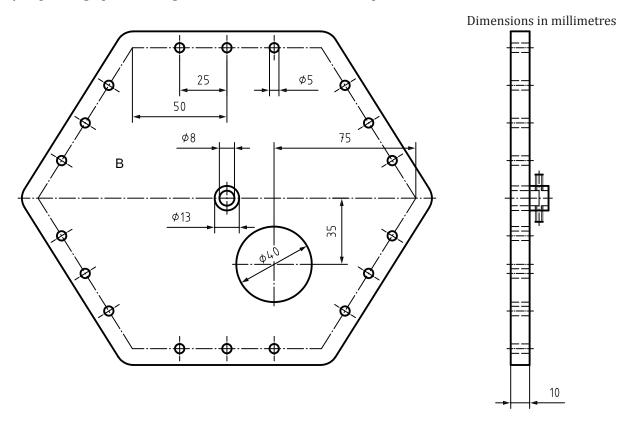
Plan view of the upper part of the tumbling barrel — Component B
